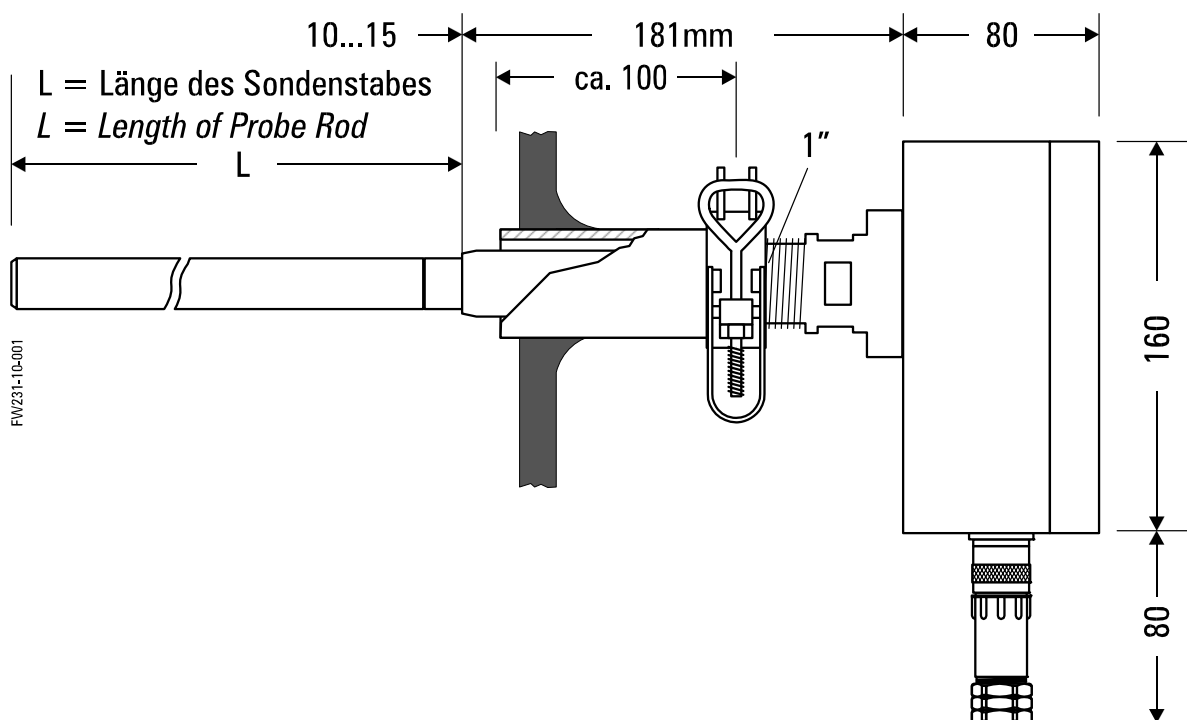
Dimensional drawing of sensor probe with quick release flange
